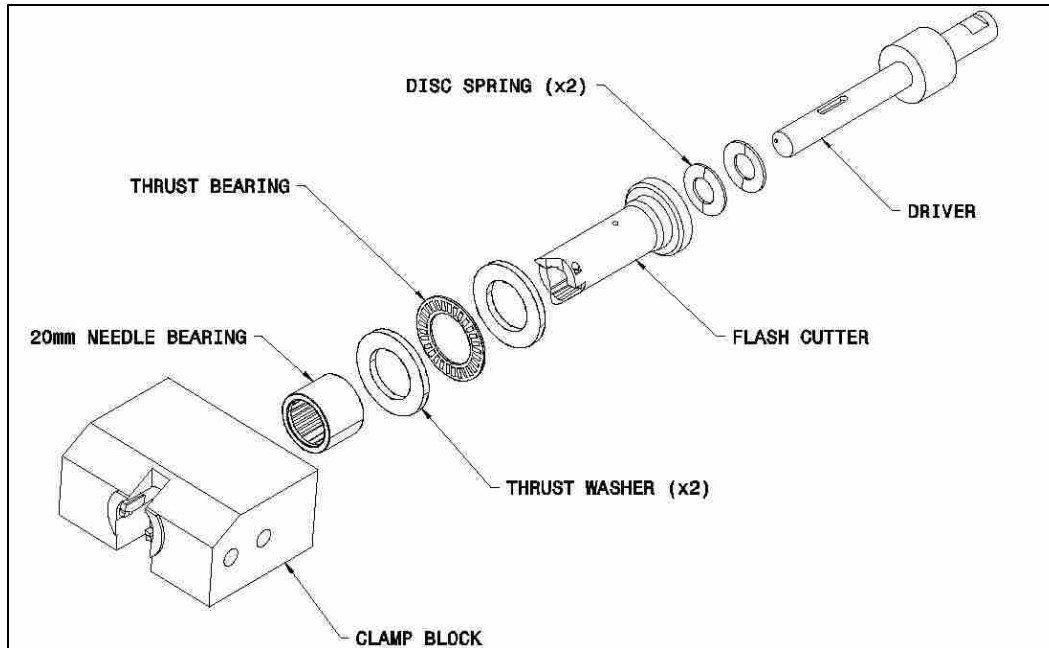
Full Clamp-Cutter-Driver Assembly
